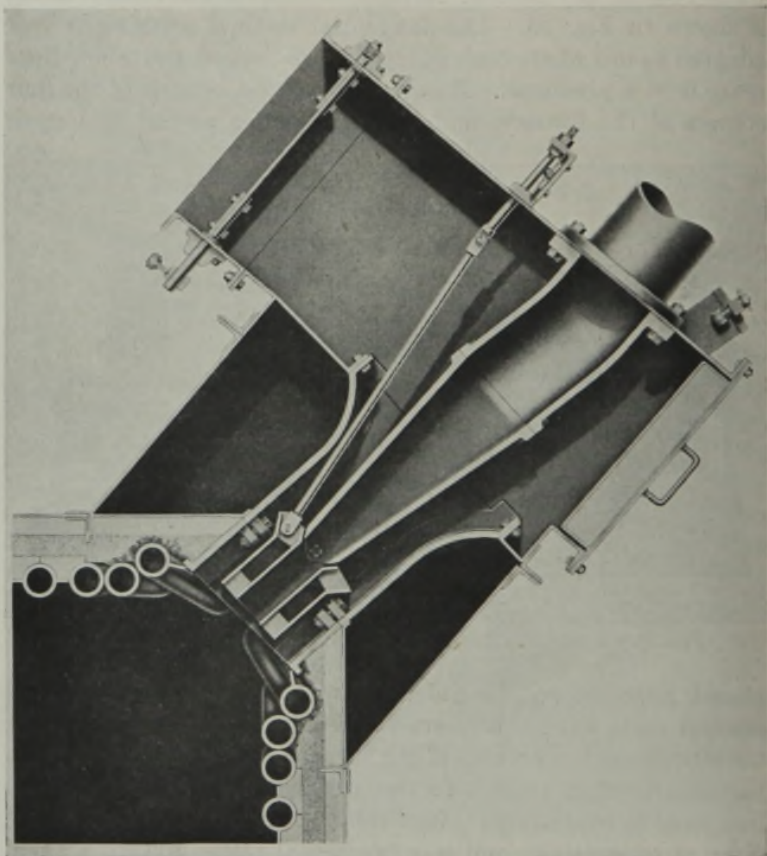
Plan view of Combustion Engineering Co. tangential burner.
